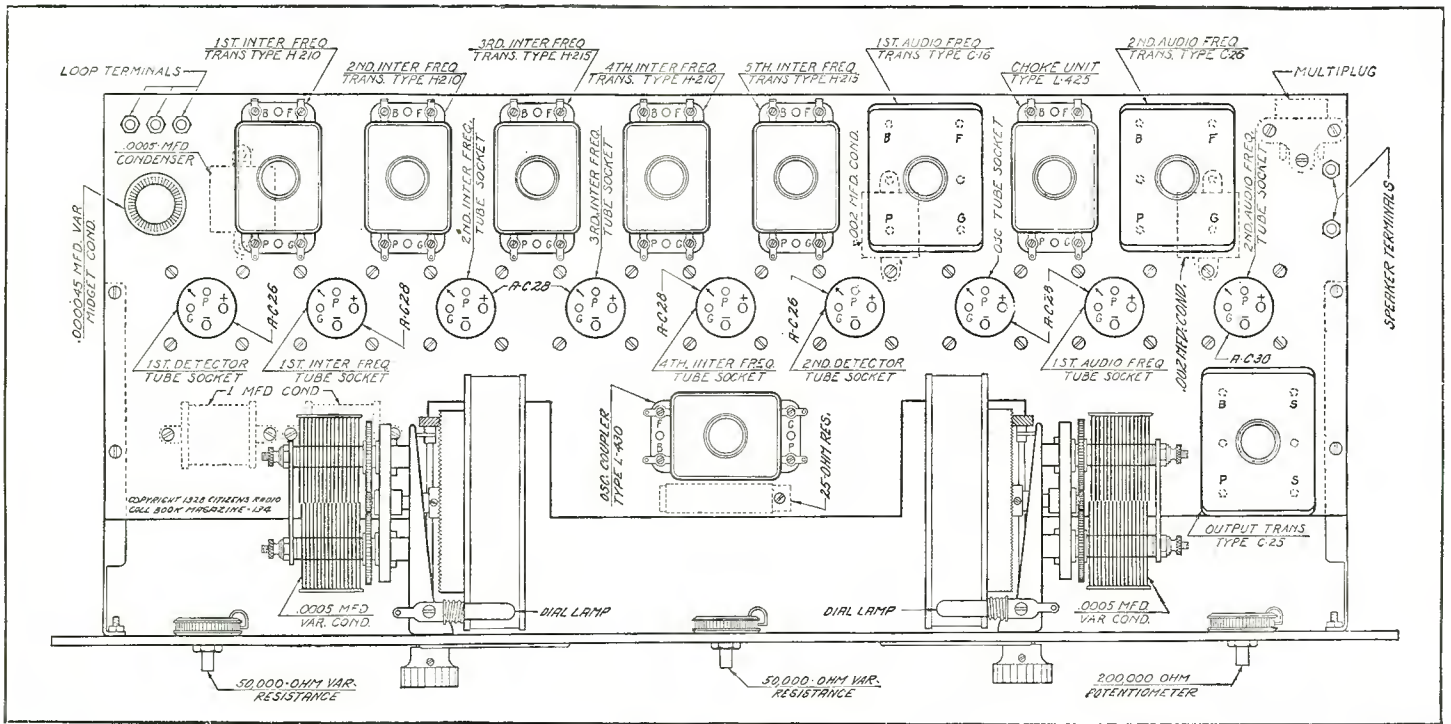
The builder is urged to lay out all parts strictly in accordance with the sub-panel layout shown in the above drawing
